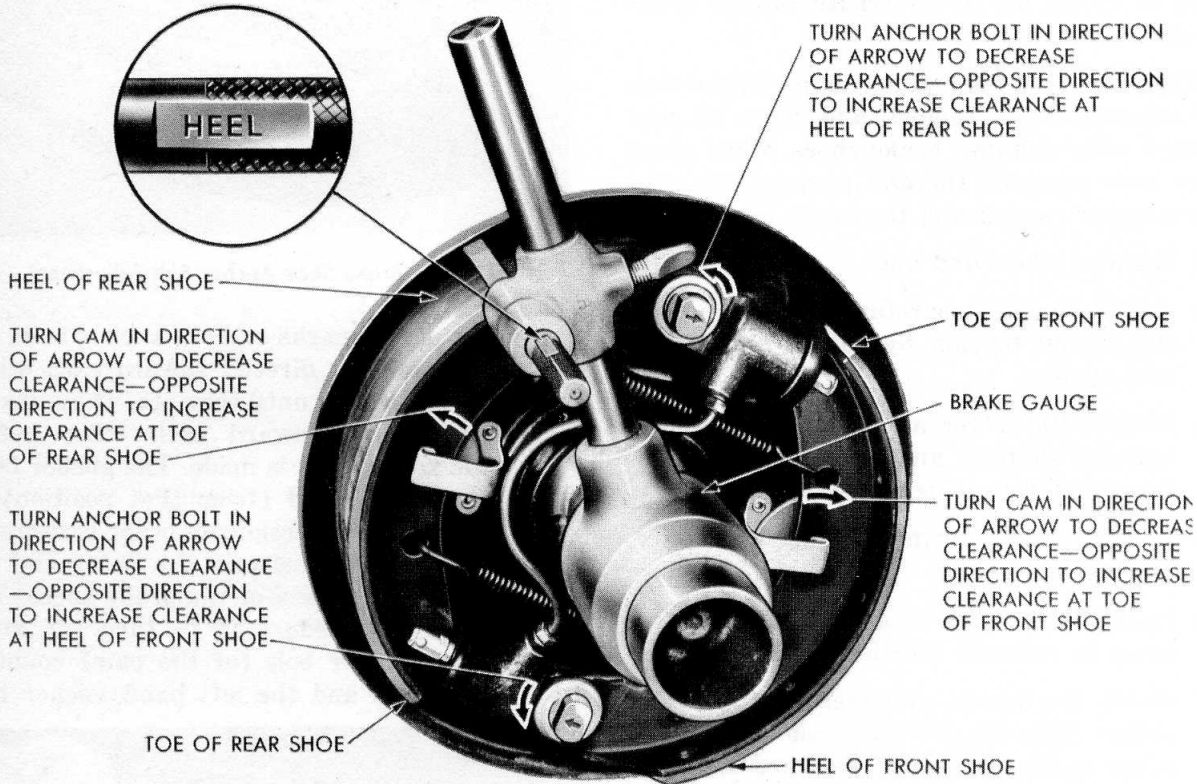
Checking Brake Shoe Toe Adjustment, Tool MT-34-B
